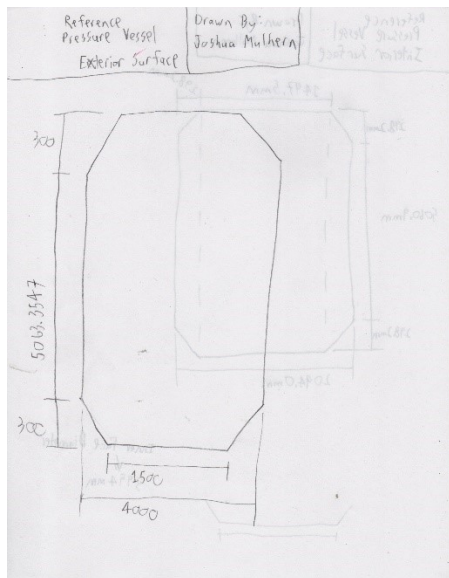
Hand Drawing Reference pressure vessel exterior surface
